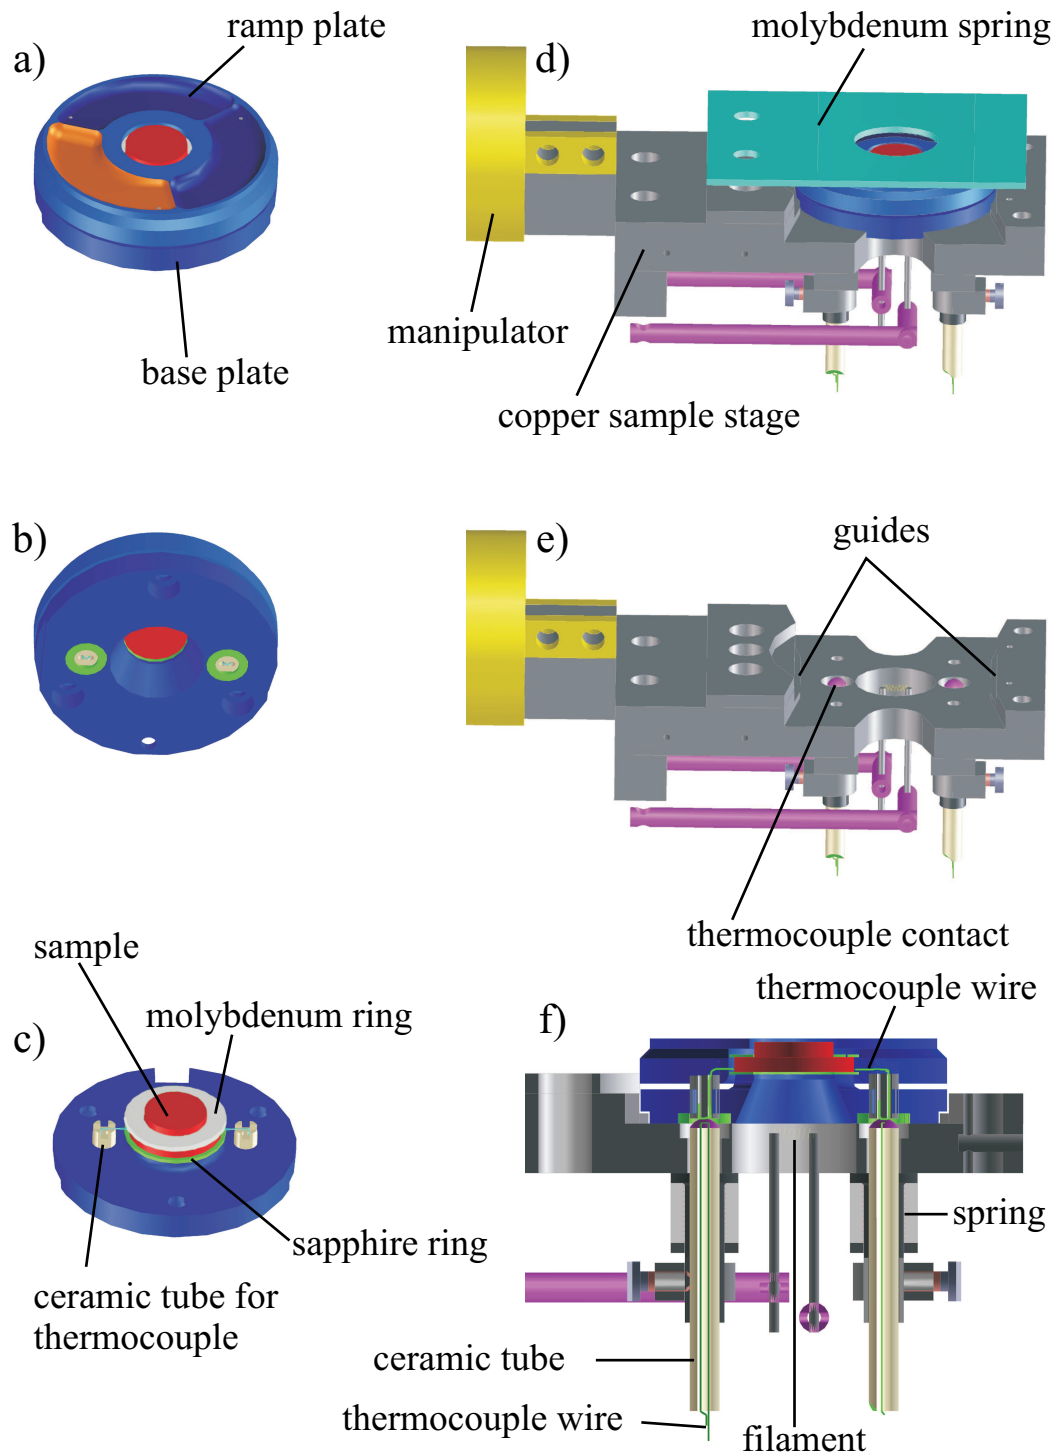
(a-c) The sample-holder: (a) Top view of the ramp plate. (b) Bottom view of the base of the sample-holder. (c) Thermocouple connections to the sample. (d-f) Manipulator sample stage: top (d,e) and section (f) views.
